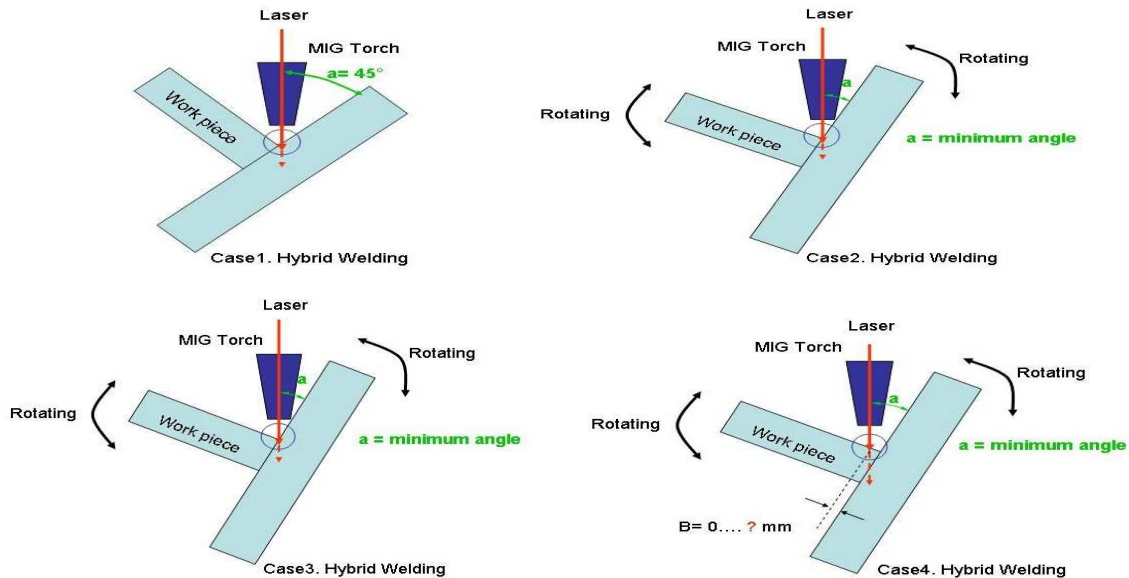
5 Principle of experimental set-up for welding process
